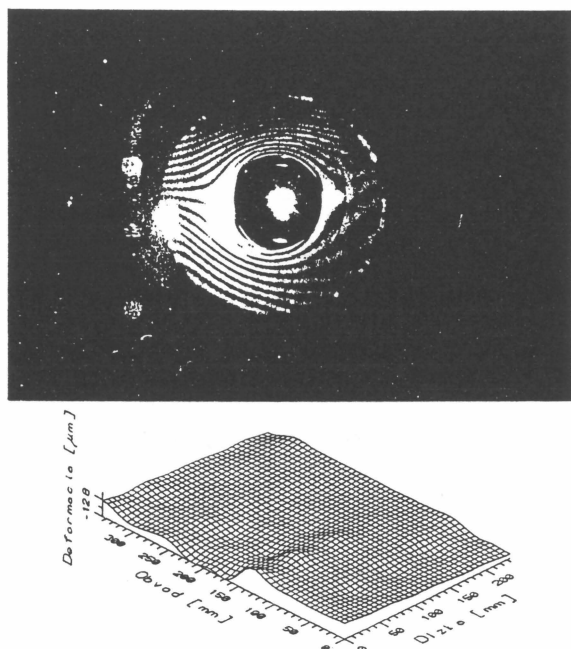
Holographic interferogram and the unfolded inside surface of the cylinder liner illustrating strain of the central cylinder after mounting of a cylinder head.
